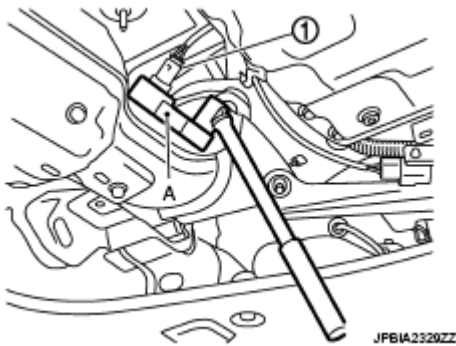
View Of Removing Heated Oxygen Sensor 2
